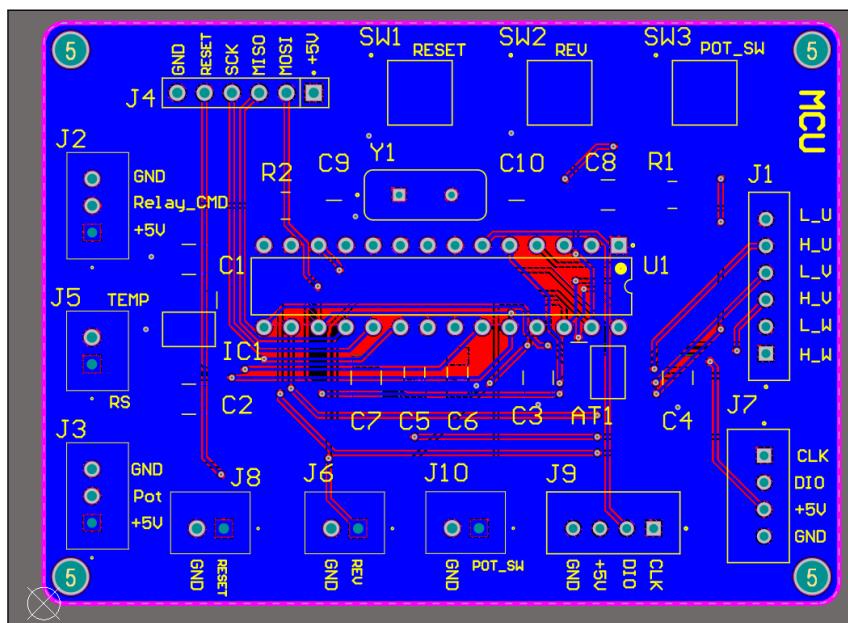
MCU Circuit Bottom Layer PCB 2D Layout
